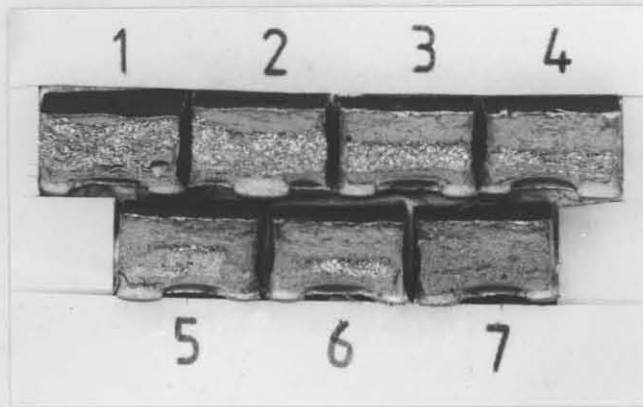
Fracture surfaces of bead-on-plate bend specimens of steel G with 24% ferrite in the HT HAZ, tested at: 1:10°C, 2:20°C, 3:32°C, 4:42°C, 5:52°C, 6:62°C and 7:72°C. The dull fracture surface resulted from ductile fracture in the weld metal while the bright fracture surface resulted from brittle cleavage fracture in the HT HAZ.
